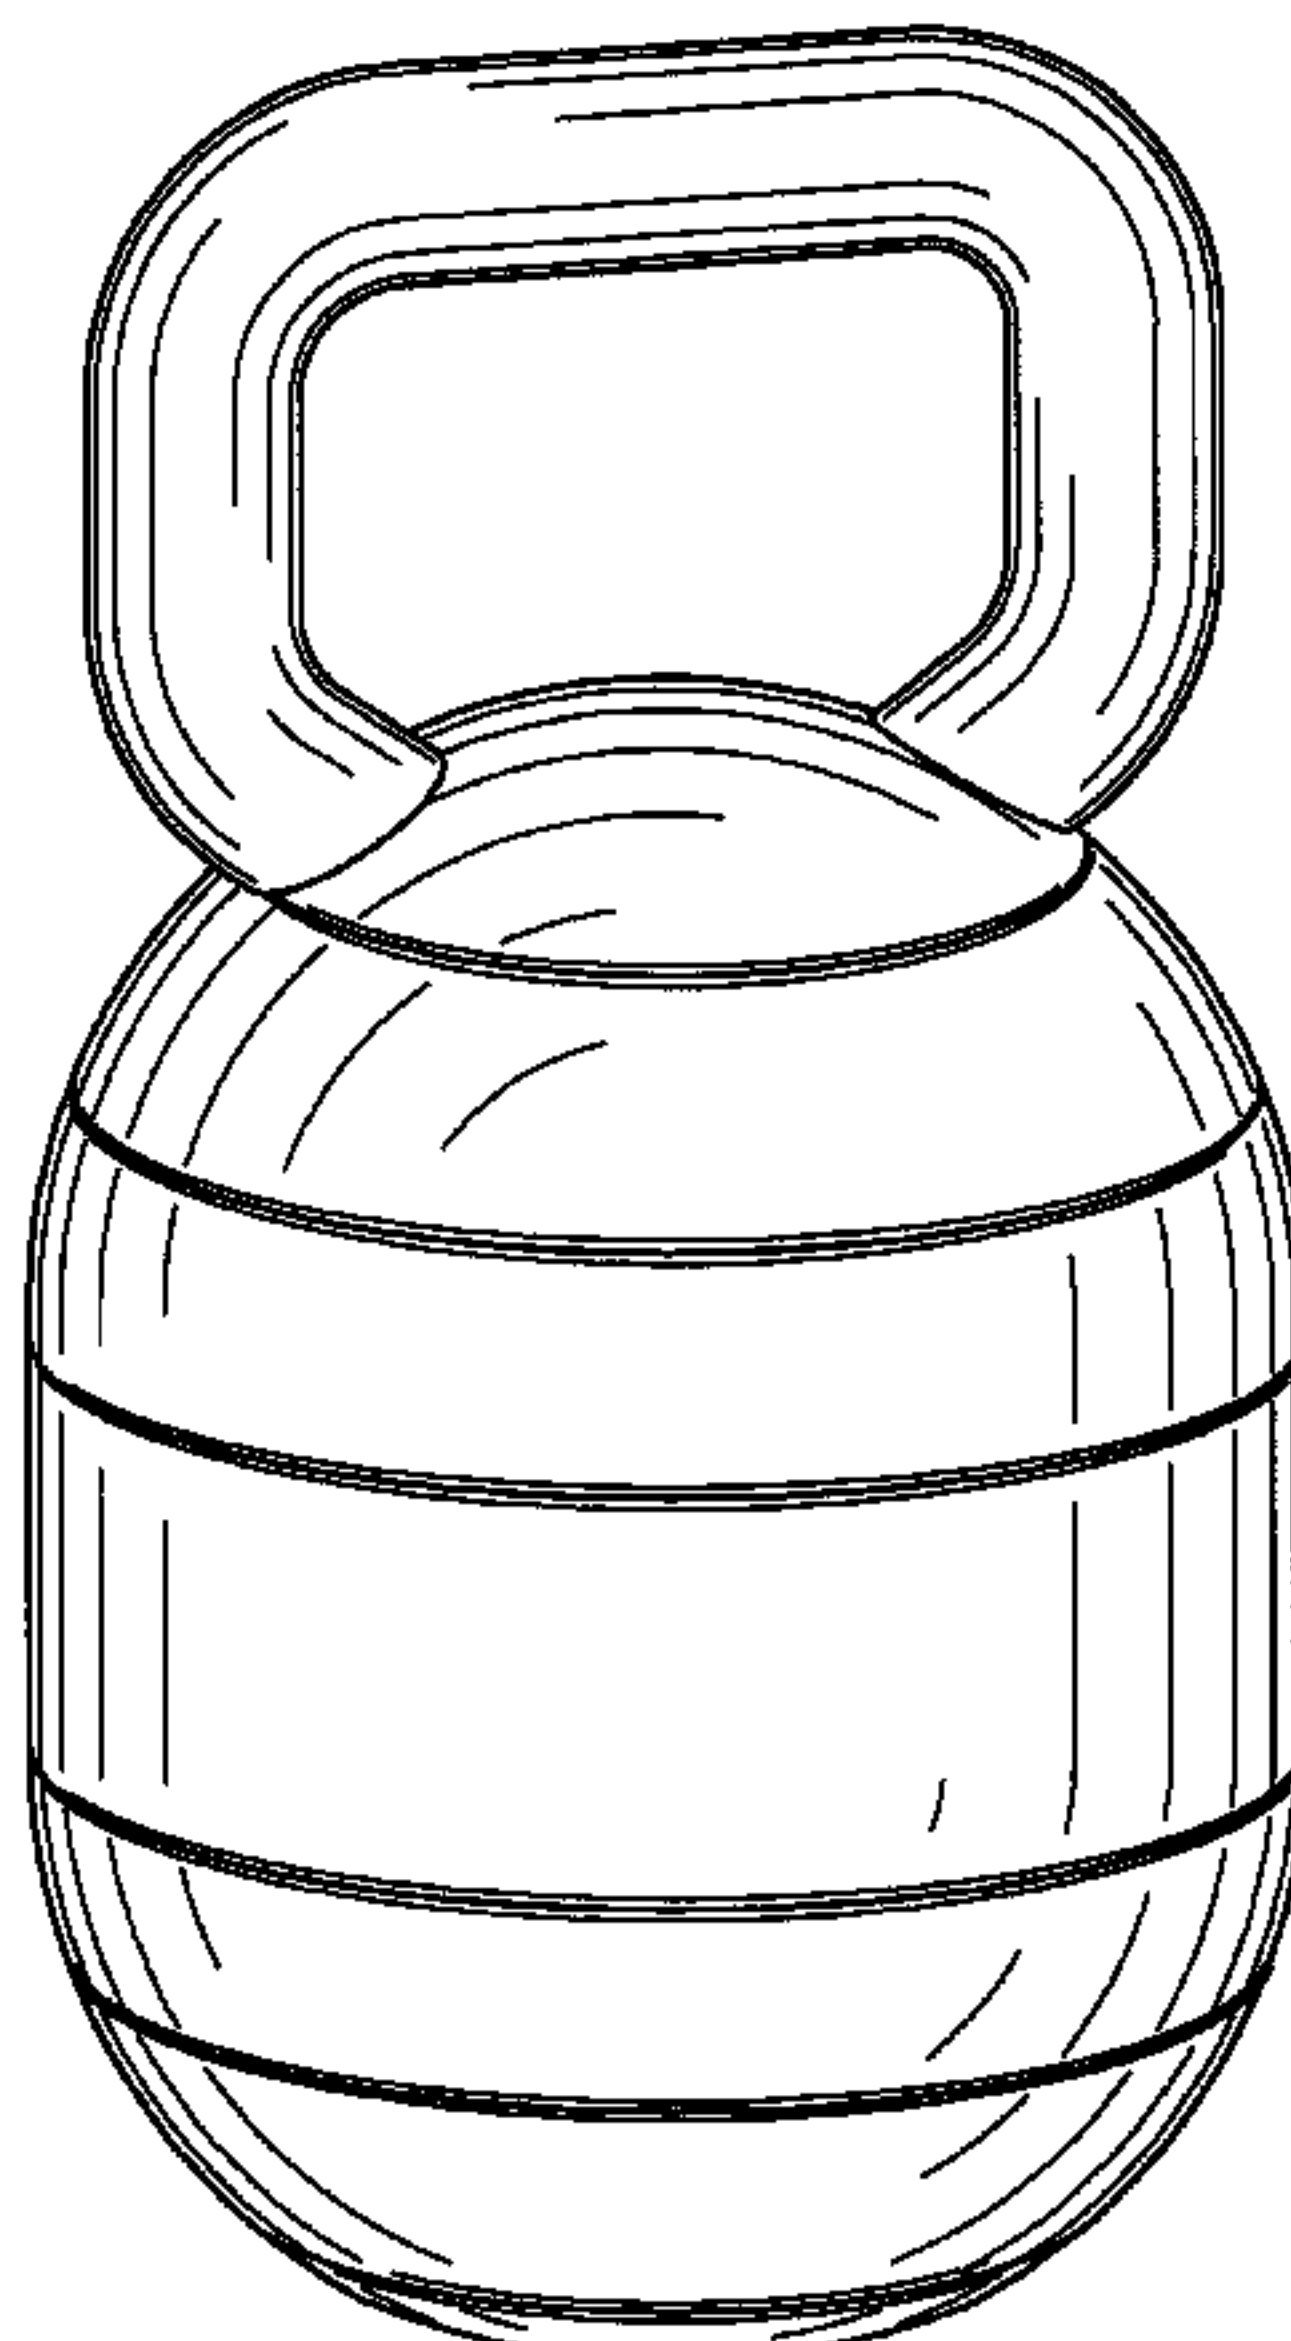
is a front view of the adjustable kettlebell shown in FIG. 1; the rear view is a mirror image;
